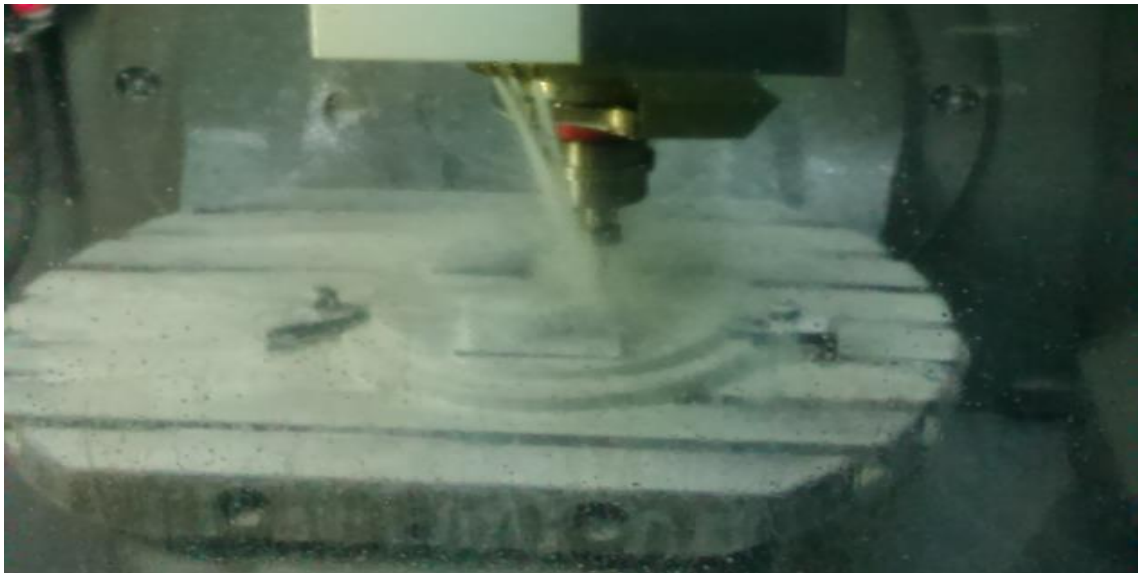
7: Rotary Ultrasonic Milling of Workpiece
